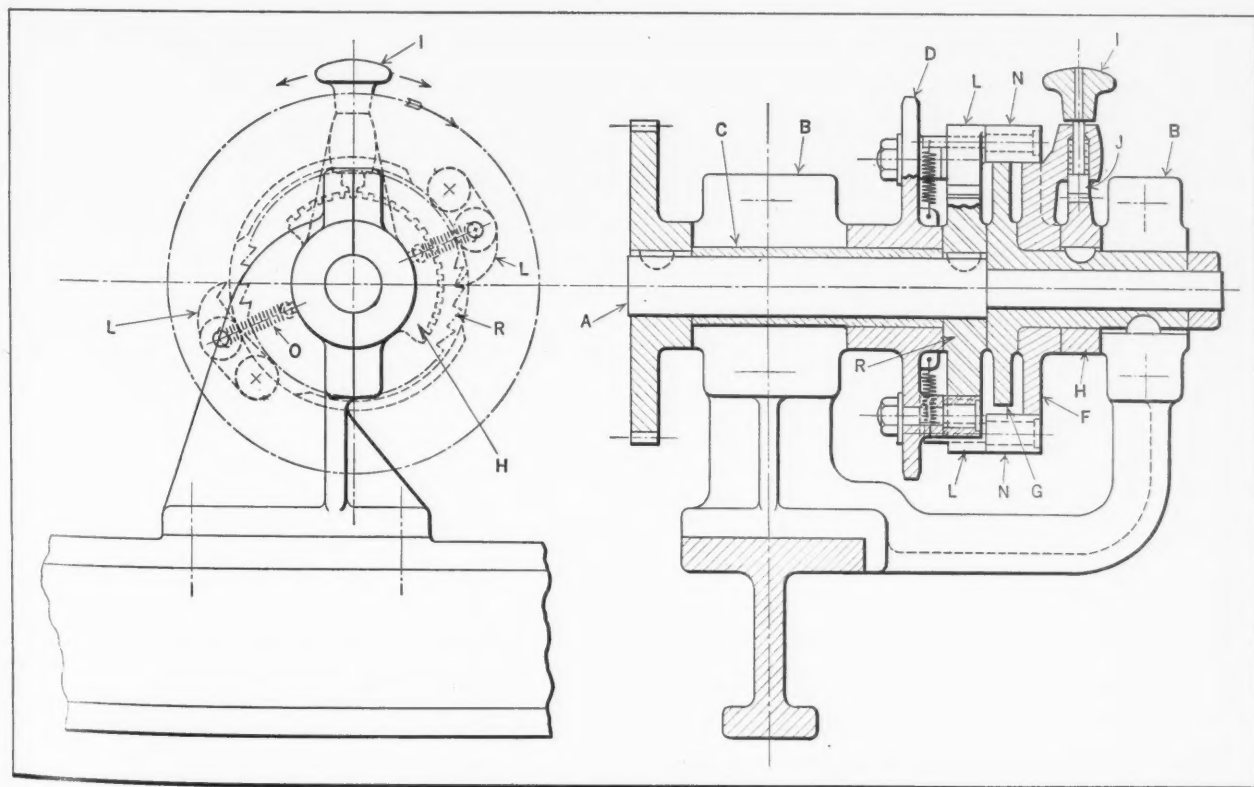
Assembly View of Mechanism for Adjusting Rate of Feed for Guides *T*, Fig. 1
